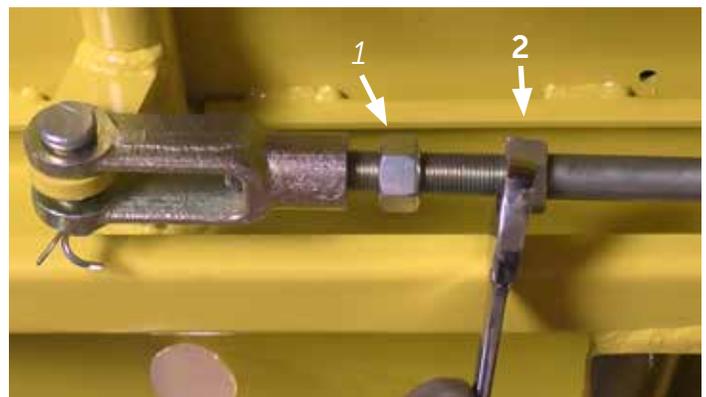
The brake rod showing the (1) jam nut and (2) adjustment nut. The jam nut must be loosened before the brake rod is adjusted and retightened after the adjustment. Each of the two brake rods, one on either side, should be adjusted equally.
